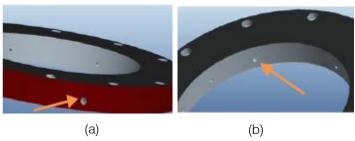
(a): Oil ring showing oil inlet to oil ring, (b) Oil holes to supply oil to honing area of liner
